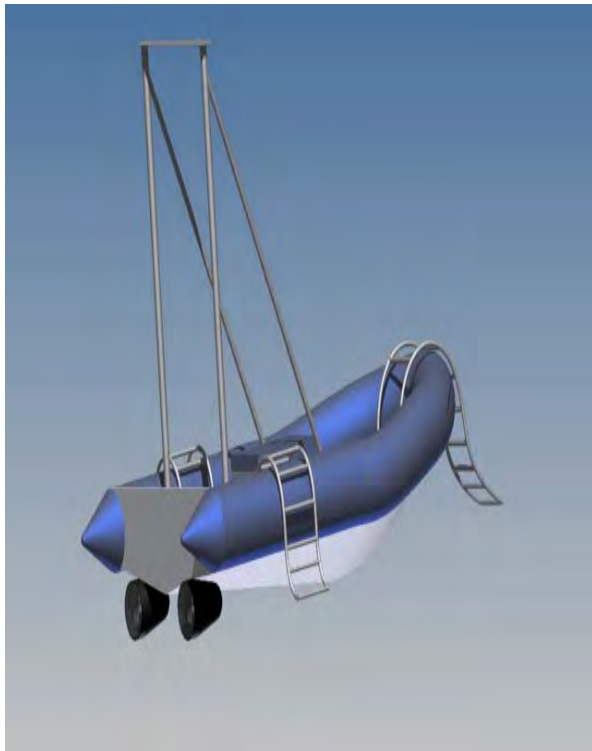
CAD Drawing of the USV Featuring Double Fixed Blade Propellers
